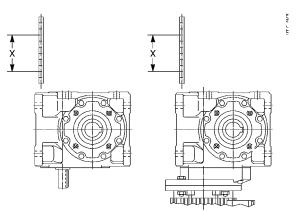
Position the gear reducer or gearmotor, mounting position B7 for the measurement of oil level (quantity).
